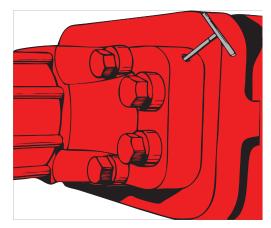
Tightening the Secondary Ram Shaft Seal
